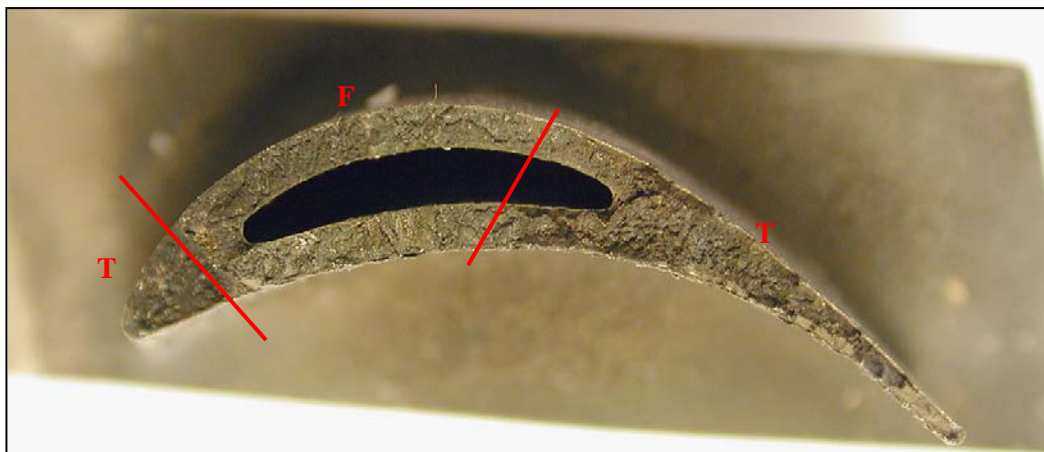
S/N HMM31295. SEM-investigation (see the following pages) showed that area F is a fatigue surface, areas T are tensile fracture surfaces.
